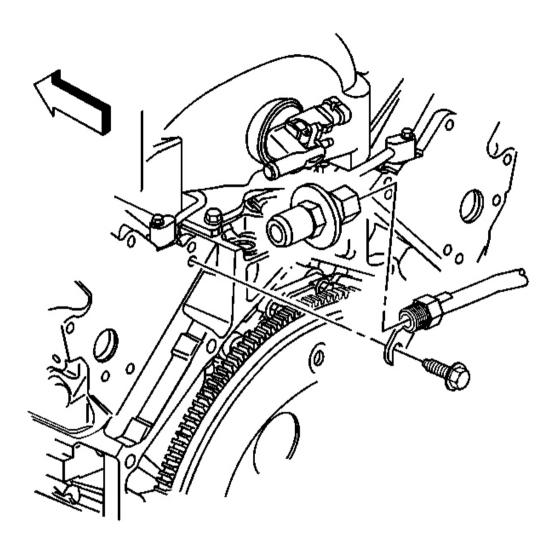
Rear Left Cylinder Head, AIR Pipe & Bolt Courtesy of GENERAL MOTORS CORP.
